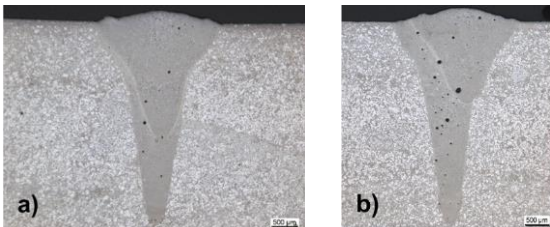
Cross-sections for a) 20 mm and b) 40 mm melt pool distance for a two spot weld path
